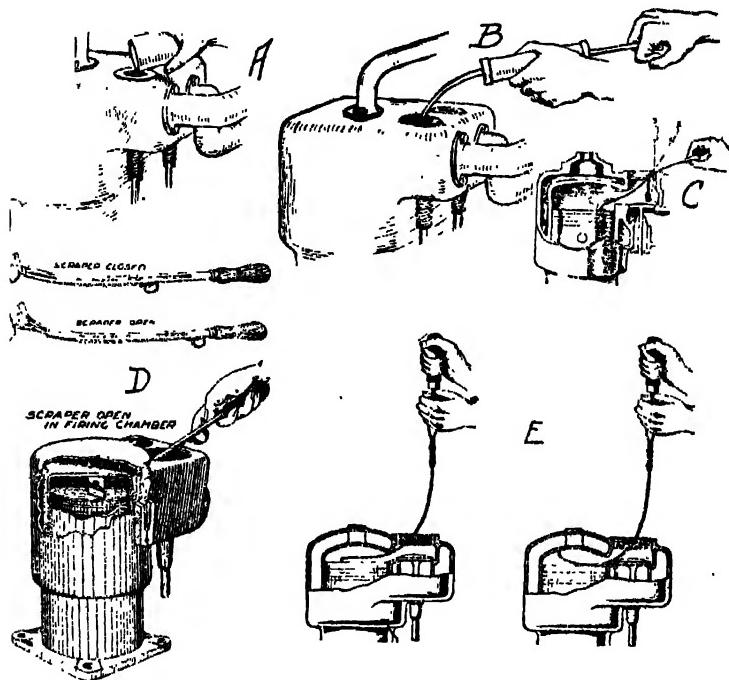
Outlining Use of Scrapers in Removing Carbon Deposit from Combustion Chamber Interior.
